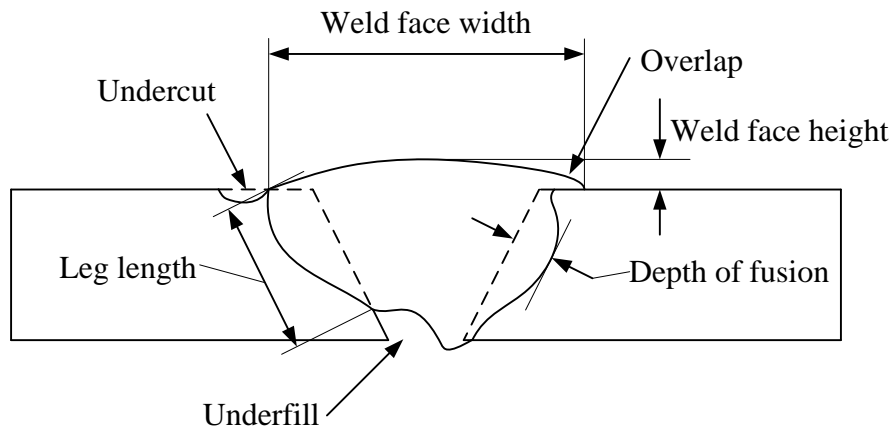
Illustration of some geometric weld quality parameters for a groove weld. The welding is made from upside and welding direction is perpendicular to the illustration.
